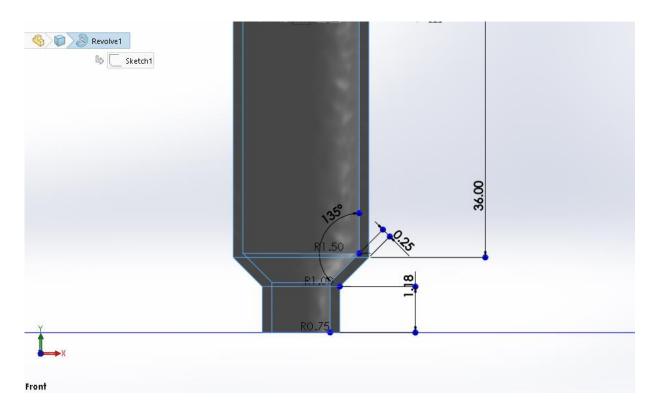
A: Initial Barrel Dimensions using Revolve Feature
